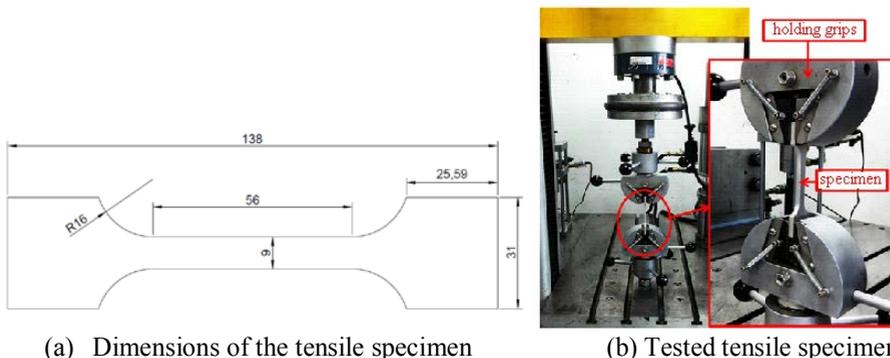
Dimensions of the tensile specimen and tested tensile specimen.
